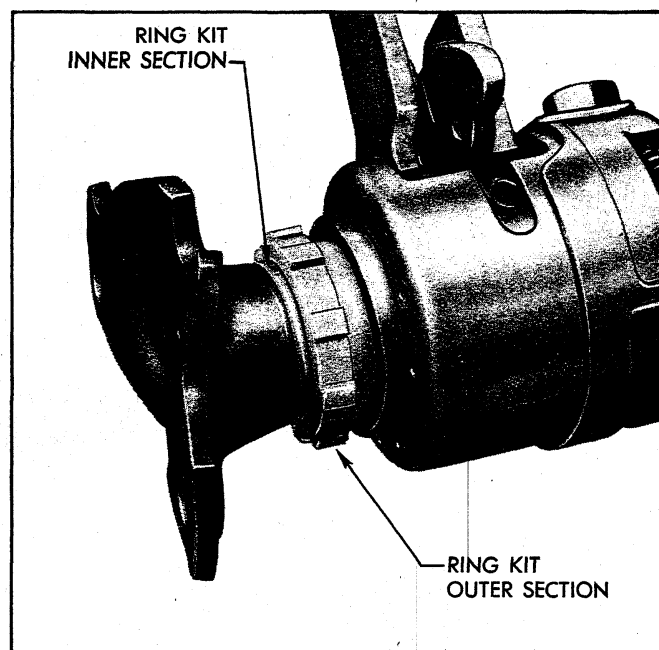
Tolerance Ring Kit—First Adjustment
